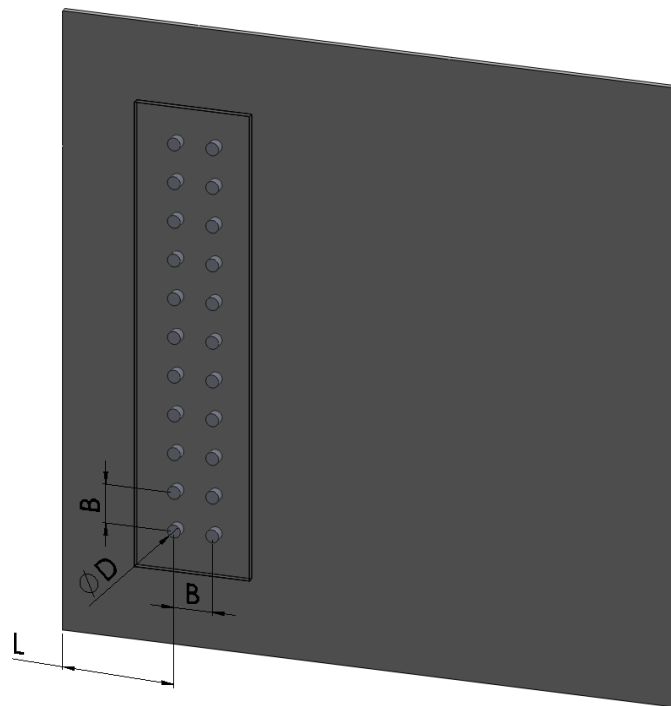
Sandwich panel with two column scatterers with retaining plates
